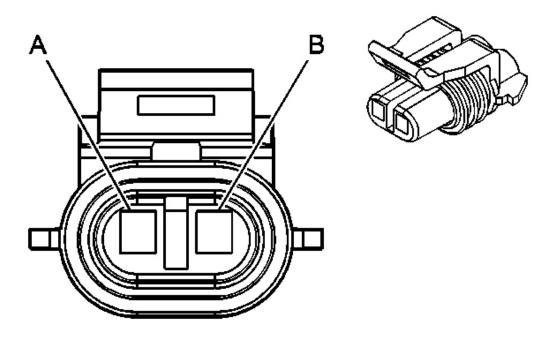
Wheel Speed Sensor (WSS) - Left Front Connector End View
